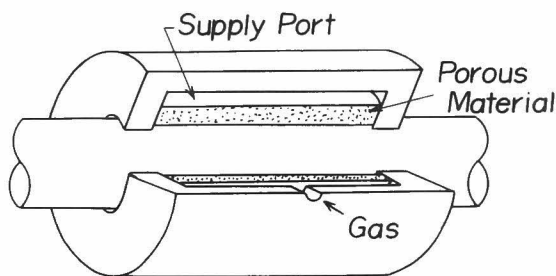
Construction of porous journal gas-bearing with 'sleeve' part
